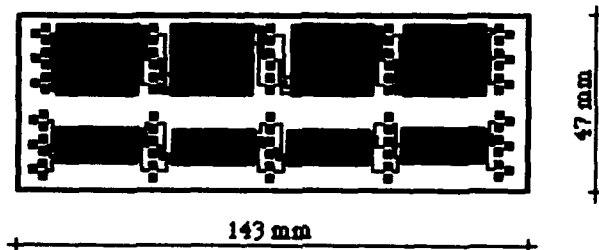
Design of a printed circuit board for direct corrosion measurements.
